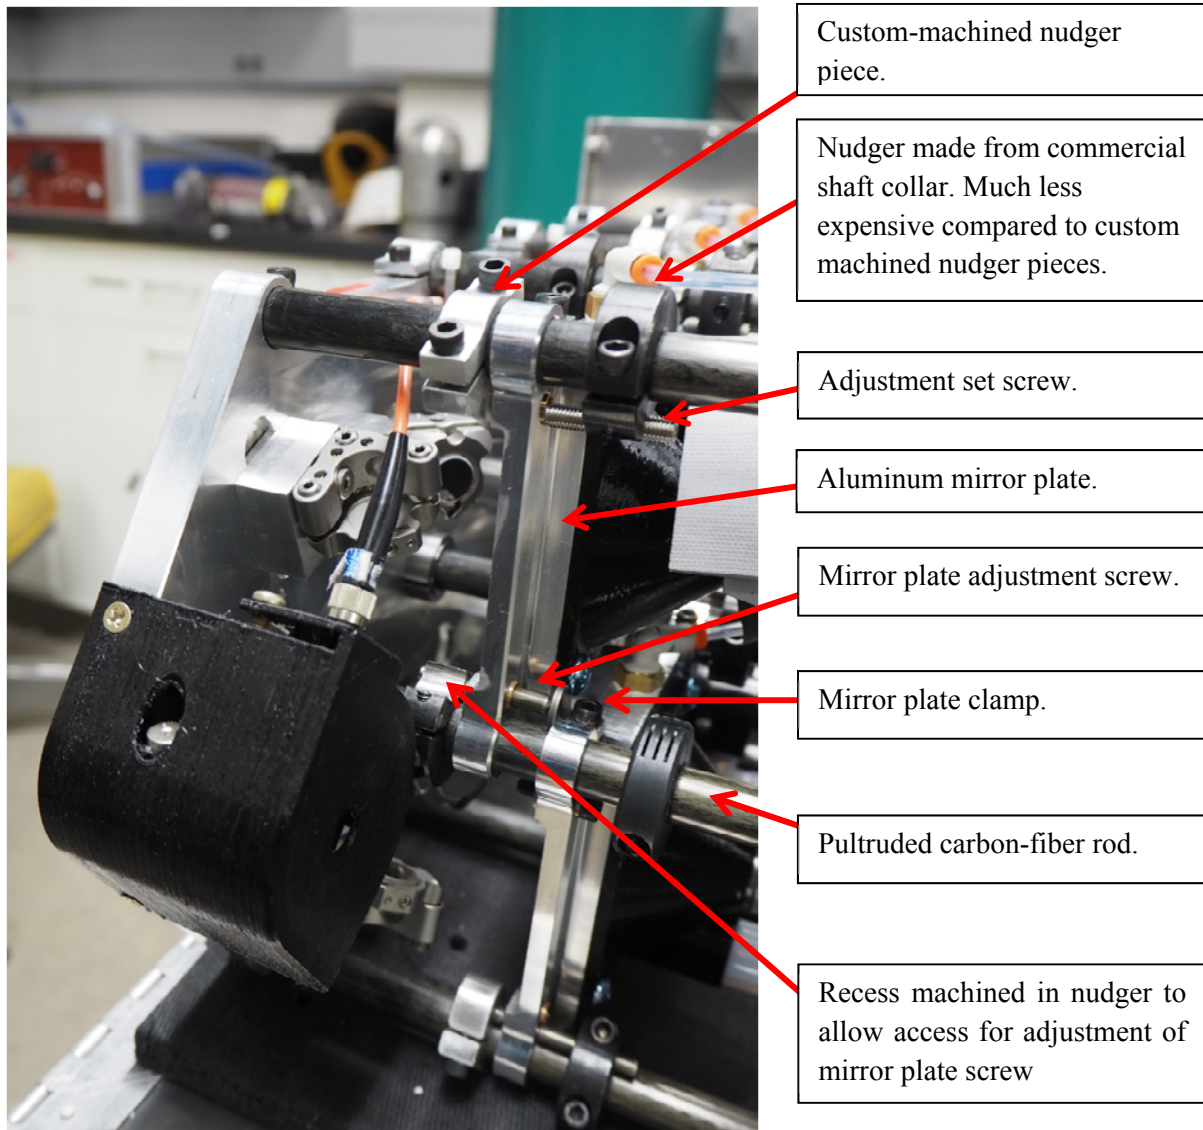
Photo showing the details of the components in the new optical cage system in the ARNOLD instrument, including the clamped mirror mounts and “nudger” pieces.
